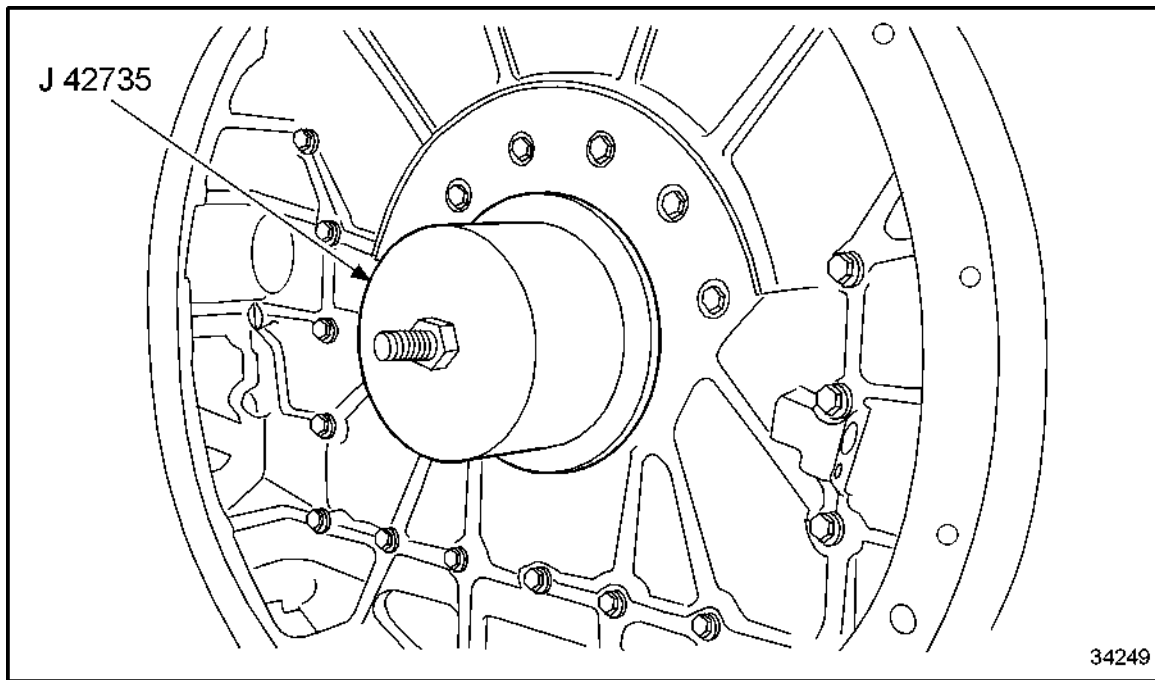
Installing Crankshaft Seal in Flywheel Housing
